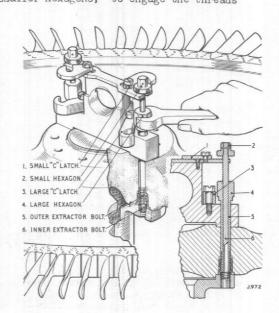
Combined extractor/lifting fixture in position on turbine disc.
